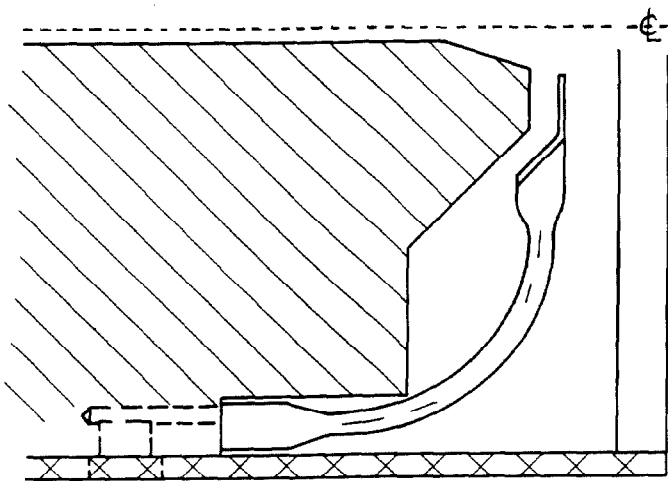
A schematic view of the Bourdon tube end tuner test arrangement.
